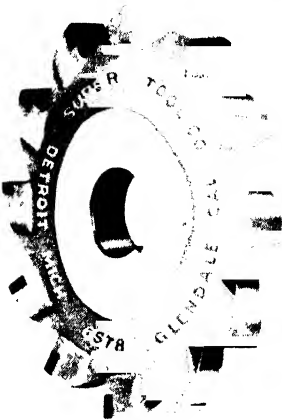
A Plain, Carbide-Tipped Milling Cutter Widely Used for Slot Milling
